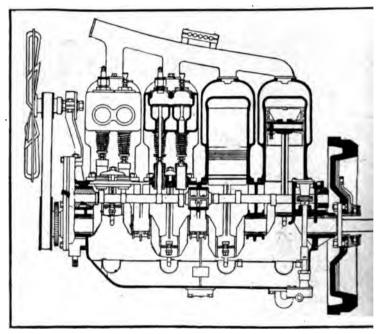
Longitudinal Sectional View of Overland Four Cylinder Ma a Type Having Individual Cylinder Castings and a Five Bea Crankshaft.
